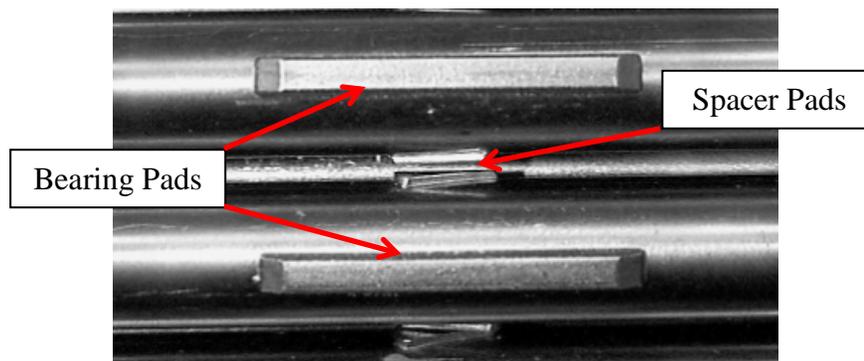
Bearing pads and spacers attached to fuel sheathing [1].
